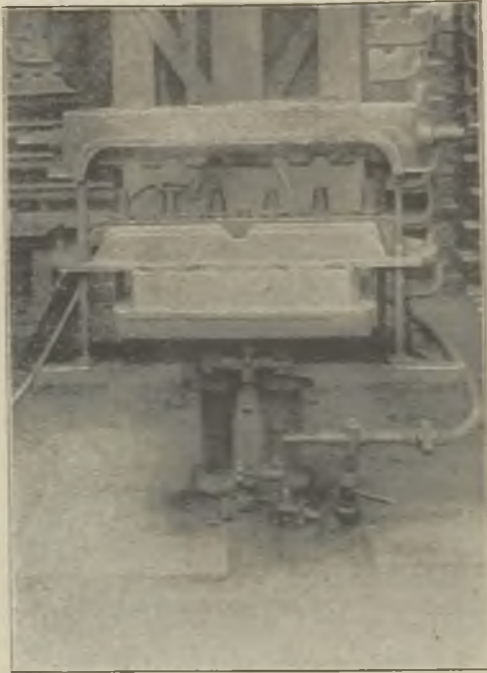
SHOWS A SIX-BORE CYLINDER MOULD ON THE MACHINE.
